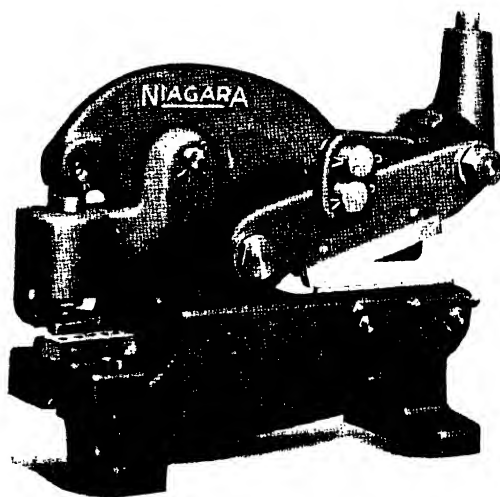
,754.—Niagara double end machine for shearing and hole punching, suitable for cutting apart and slitting sheets of any length and width. Frame is off-set to provide clearance for the several edges of long sheets during slitting. In operation, the lever works down toward the operator whether he faces the punching or the shearing end of the machine. The hold down attachment prevents material from raising while being cut and an adjustable gauge is provided.
